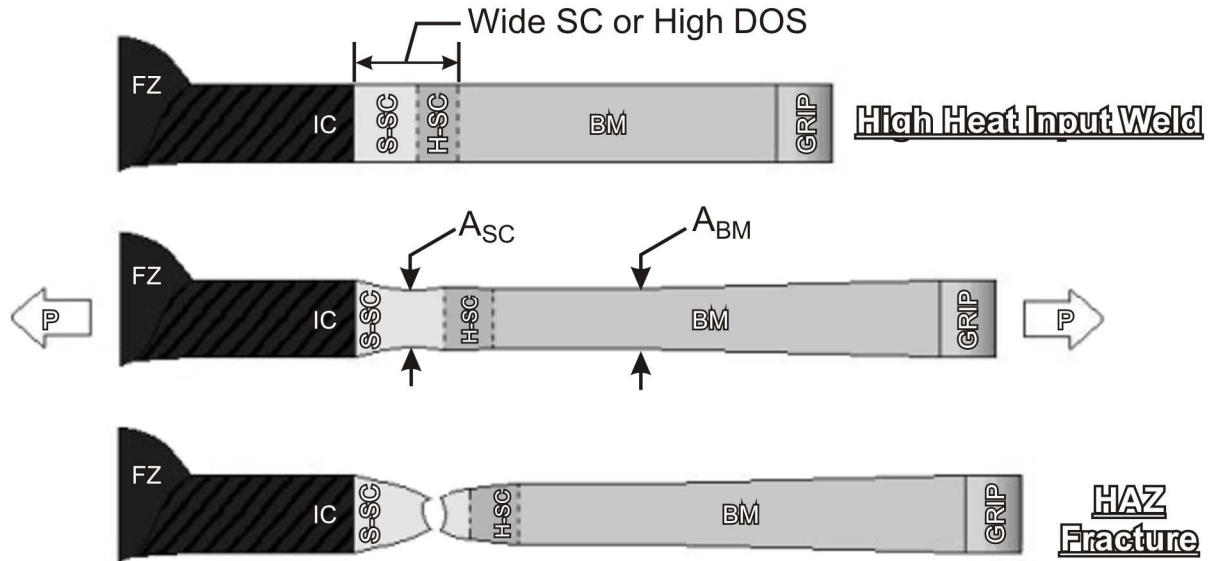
An illustration of heat affected zone fracture that occurred during uniaxial transverse weld tensile testing of Cr-Mo DP600 steel. Top image: A high heat input weld cross-section, which depicts a wide HAZ with high DOS. Middle image: The weld in tension at maximum diffuse necking prior to strain localization. Bottom image: the resulting HAZ fracture location.
